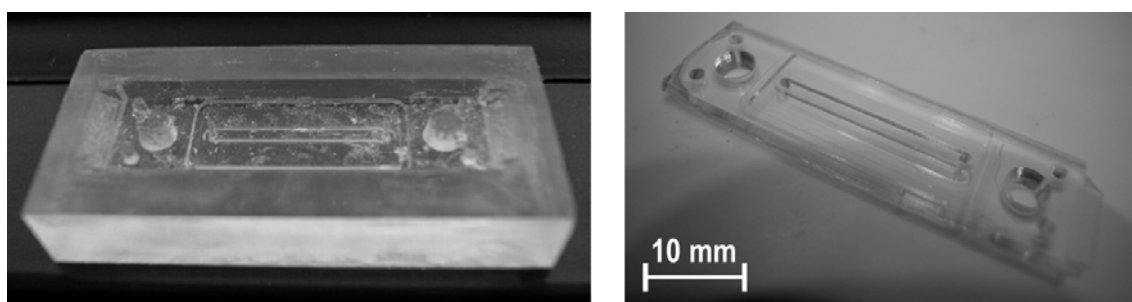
Photograph of an epoxy resin mold (left) and molded PDMS fluidic device (right).
